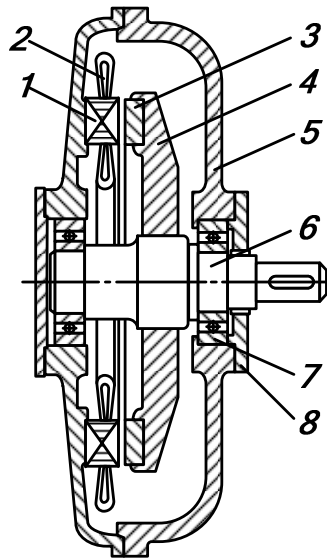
Frontal disc-type machine: 1 – stator core, 2 – stator winding, 3 – permanent magnets, 4 – rotor core, 5 – end shields, 6 – shaft, 7 – bearings, 8 – bearing caps
